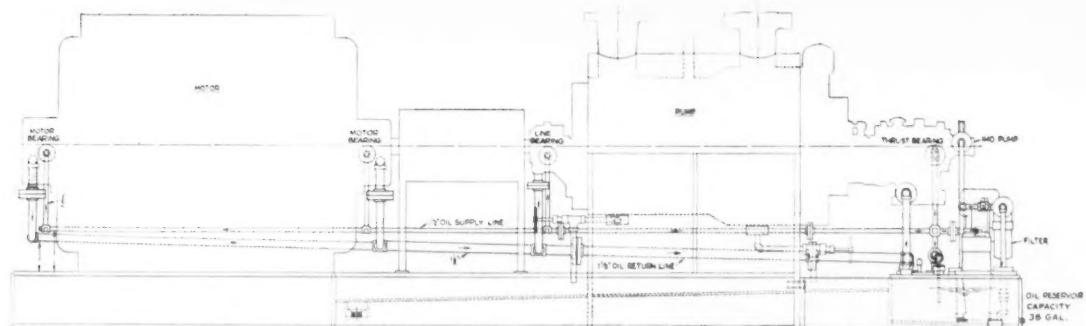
Side elevation of the oil piping layout for a Worthington boiler feed pump.
